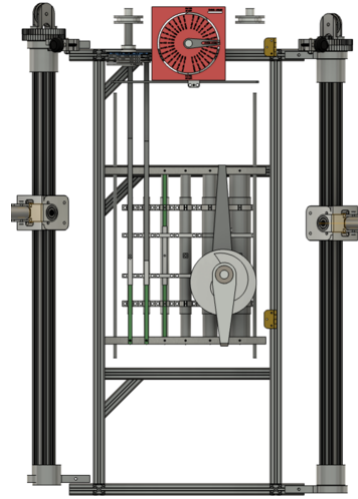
All-in-one home gym CAD model design on the pneumatic cylinder mechanisms layout
